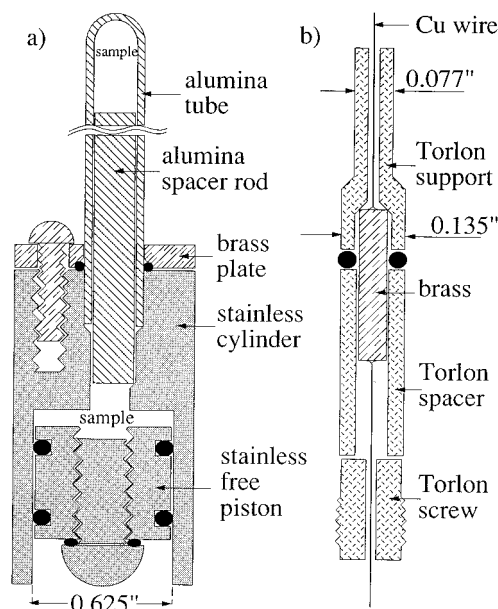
(a) Detail of the ceramic sample tube and free-piston pressure balancing arrangement. The stainless-steel cylinder and piston are far from the heated region and remain cool. (b) One of the five electrical feedthroughs, located in the upper brass end plug (see Fig. 1). The screw has small wrench flats to assist tightening.
